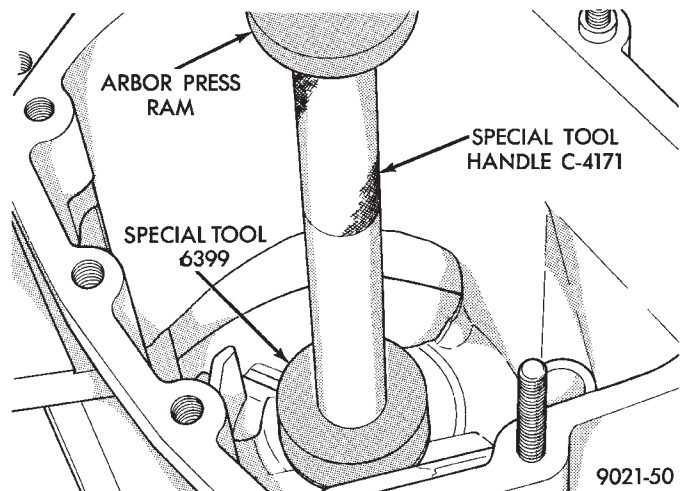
Remove Intermediate Shaft Front Bearing
